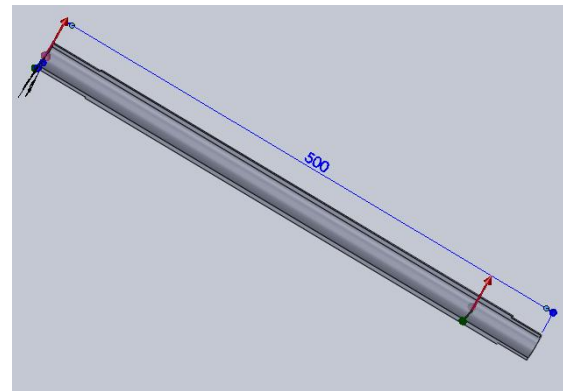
Hollow Shaft of 30 mm OD and 22 mm ID Length will be 500 mm.
